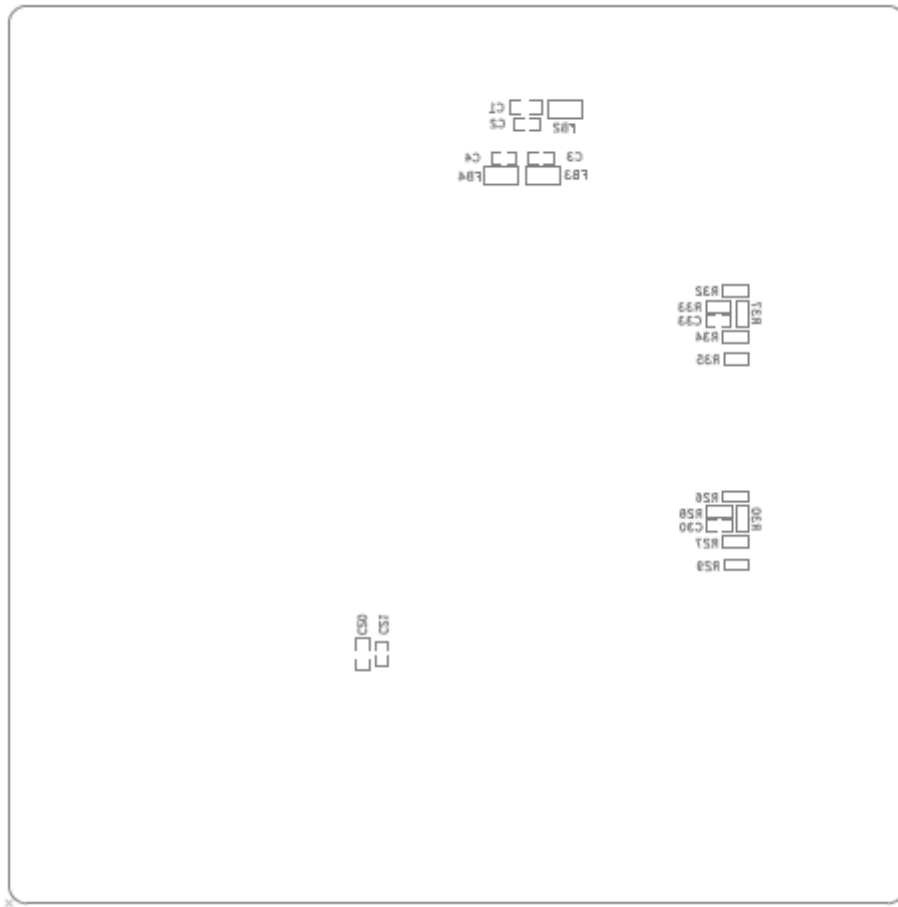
Evaluation Board Layout, Bottom Silkscreen
